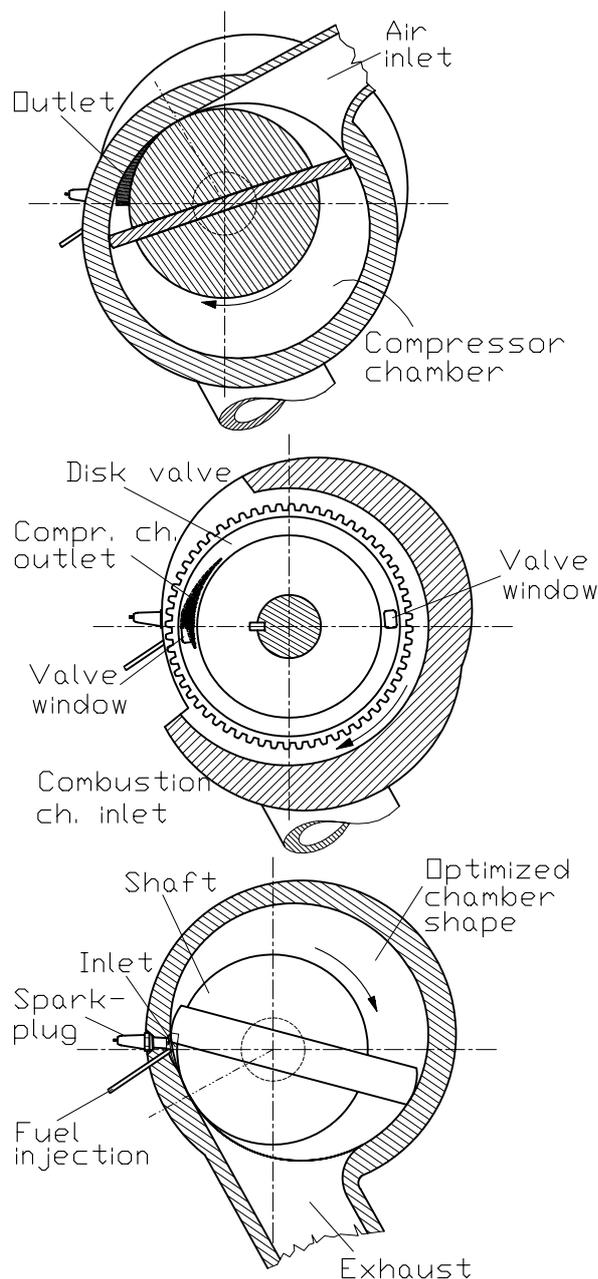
Layout of a rotary internal combustion engine in three cross sections
